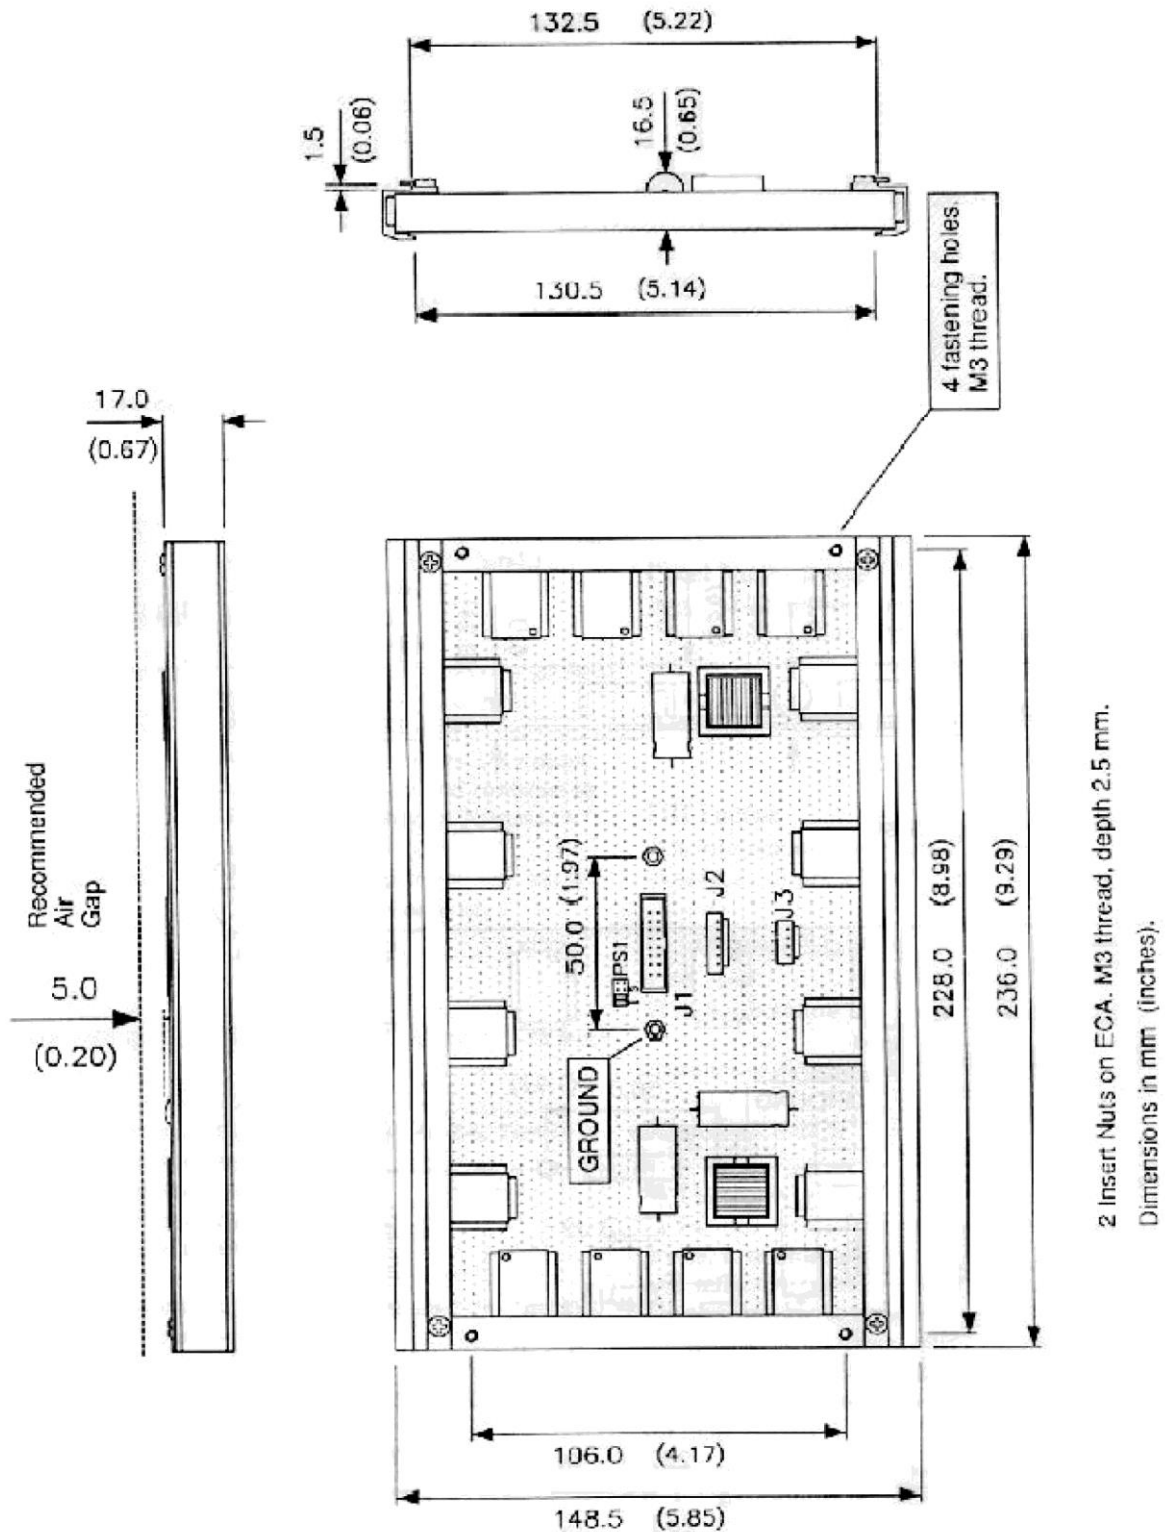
Back and side views with FRA aluminum mounting frame (dimensions in mm)
